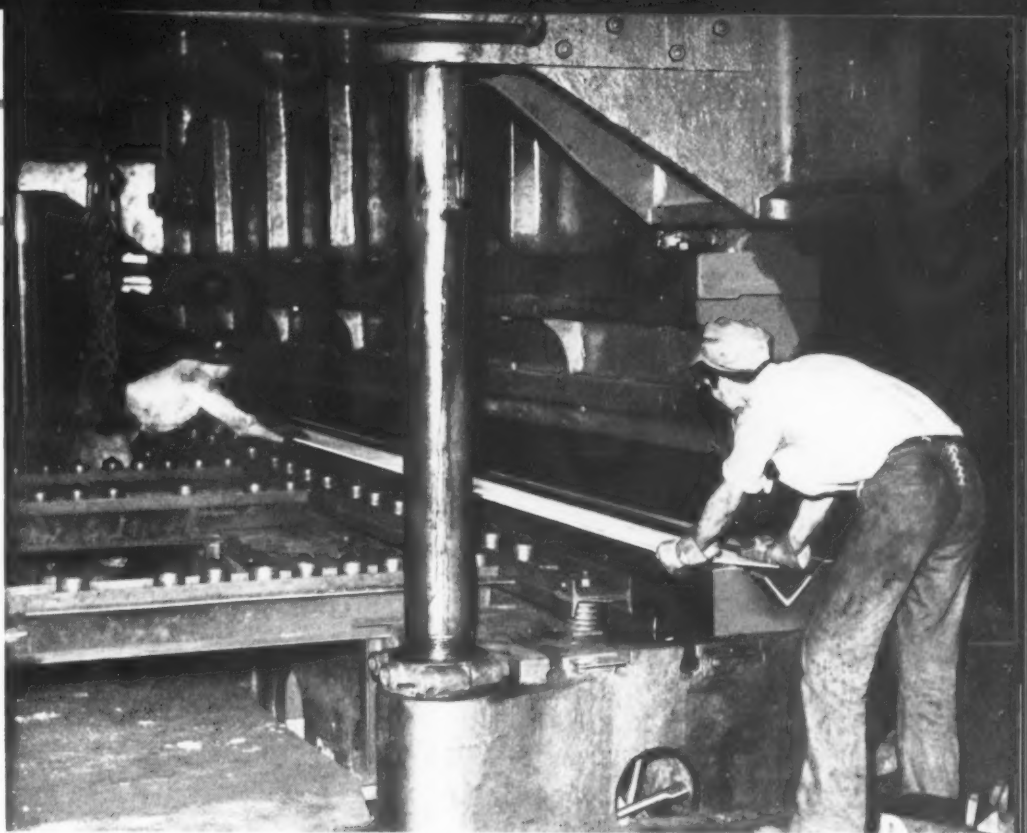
Straightening a Plate between Rolls prior to Fabrication into a Ship Section
